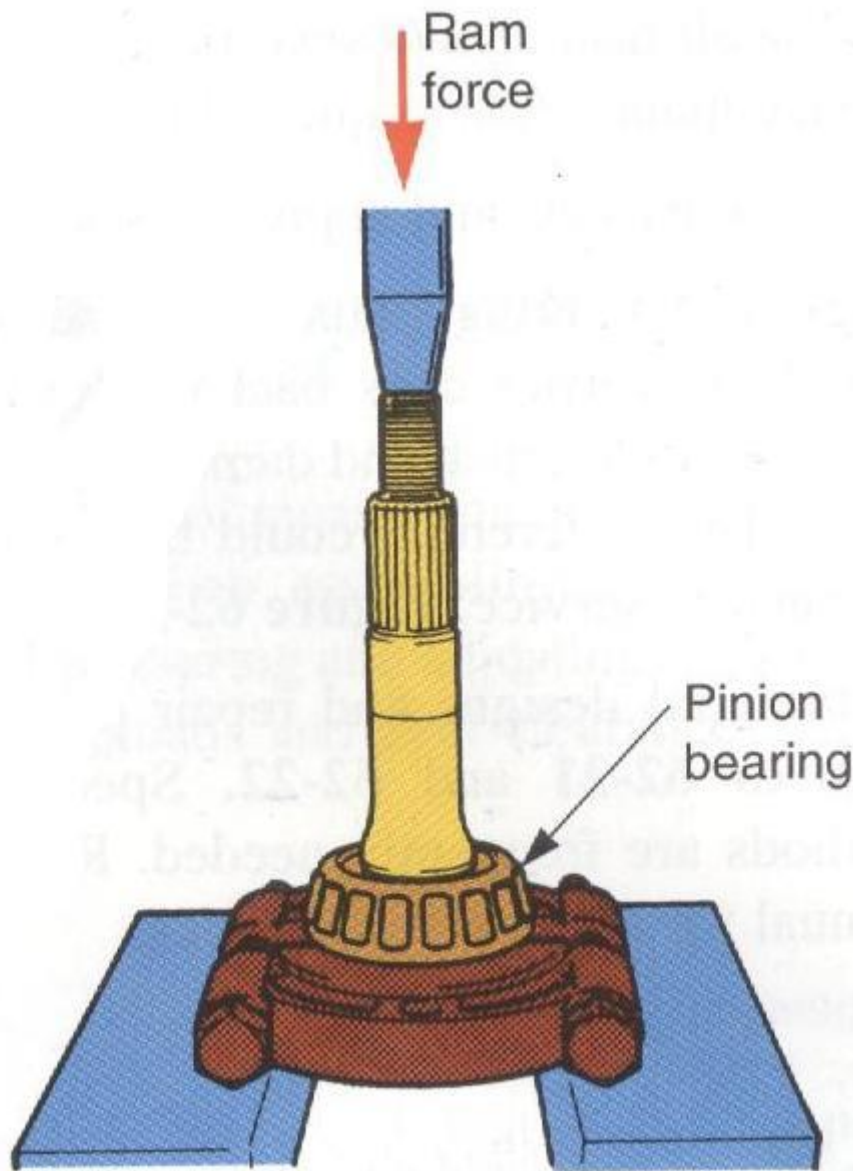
Use a press to remove pinion bearing. Stand back and use the recommended driving tools.
